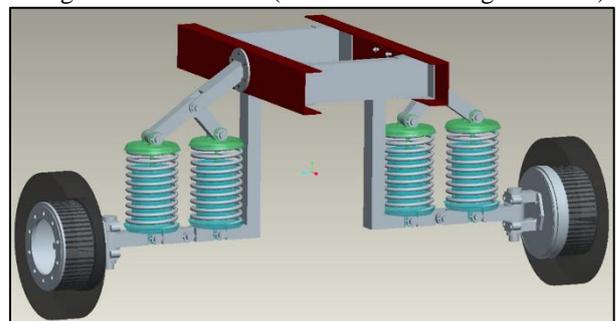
Independent Front Wheel Suspension Unit Assembly
